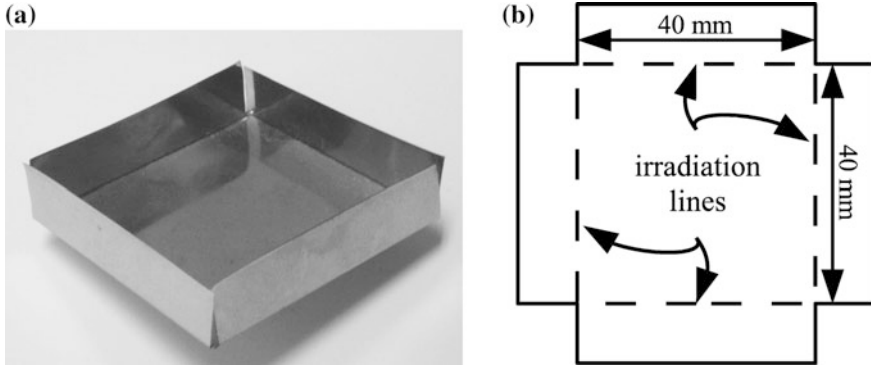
Box produced by laser bending (a) and sheet geometry before bending (b). Laser beam power 100 W, 50 irradiations per side, spot size 0.03 mm, beam velocity 500 mm s^{-1} , stainless steel (1.4310)
